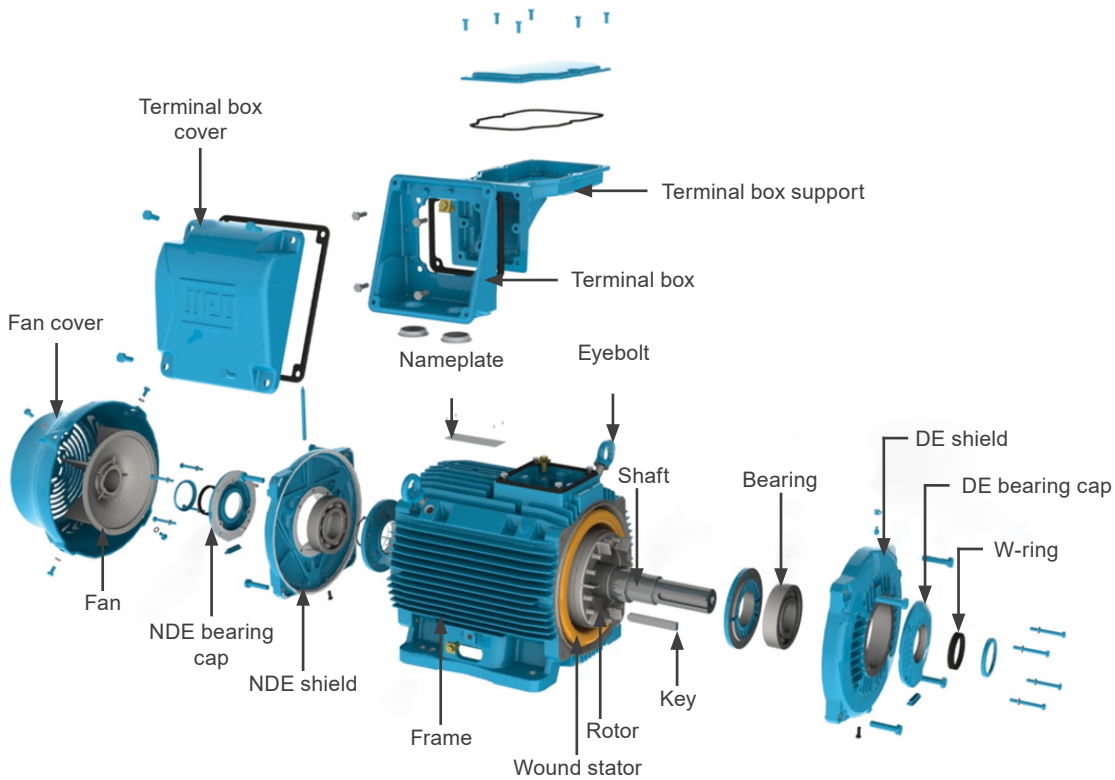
Exploded view of the components of a motor with the type of protection "ec"
